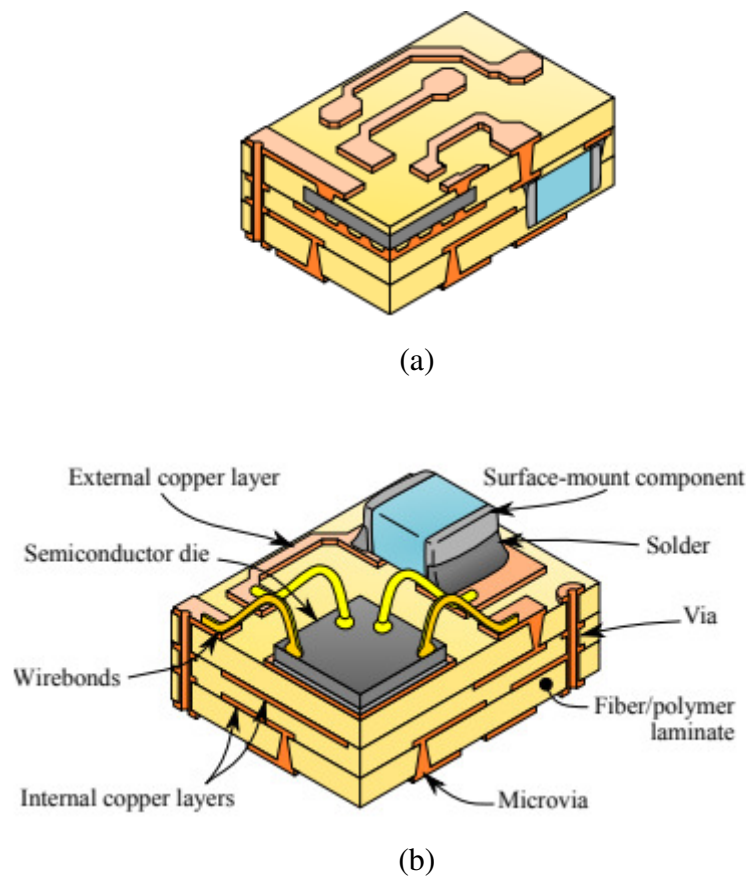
A discloses the infrastructure of the PCB and B illustrates the components of the PCB [6].
